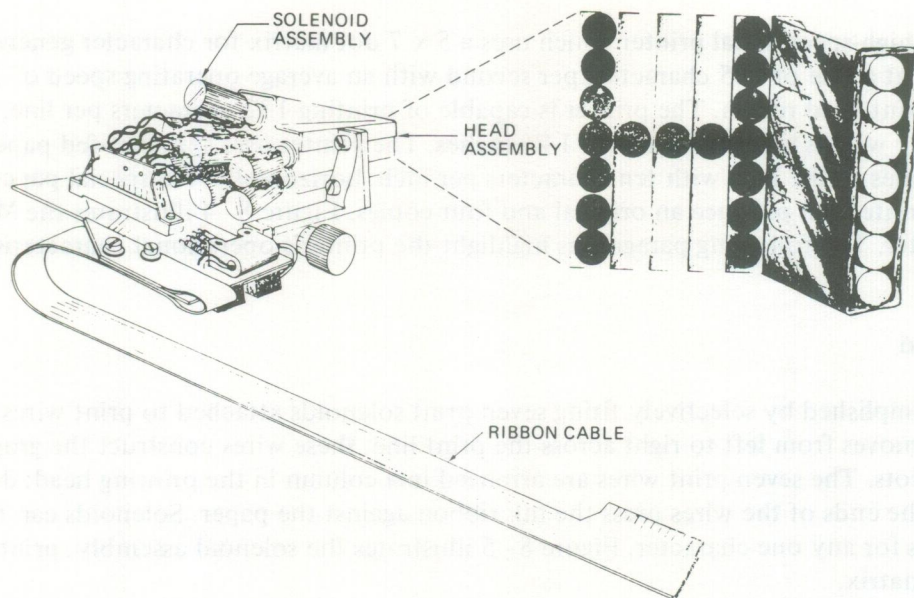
Solenoid Assembly, Print Head and Character Matrix
